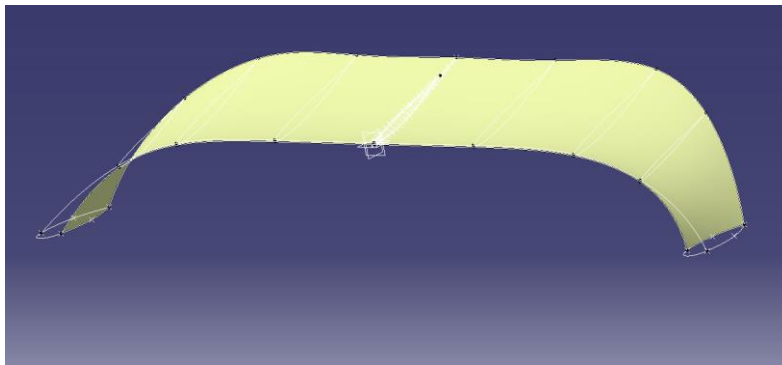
Design of the BOTTOM surface of the spoiler using Surface technique
